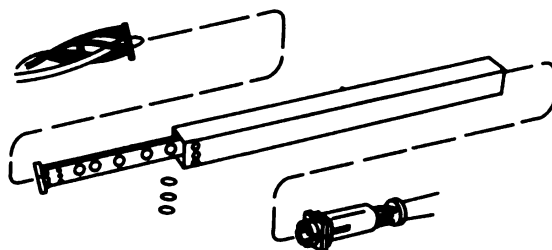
Special fuel assembly for foil exposure, showing foils.
